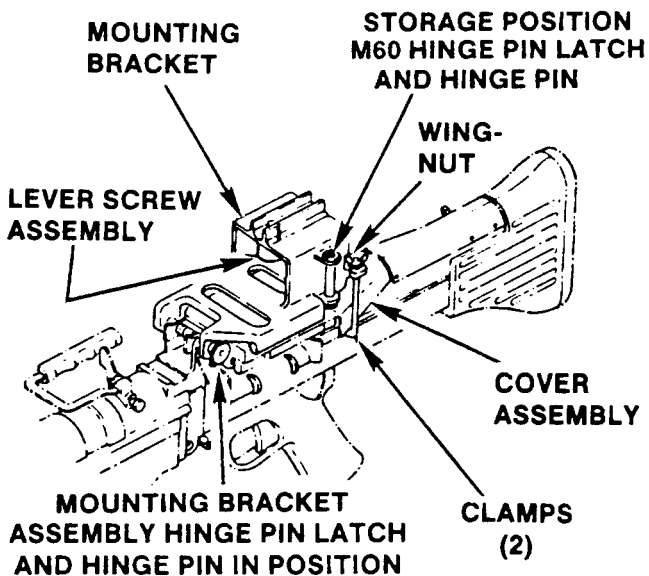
Installation of Mounting Bracket Assembly, M60.
